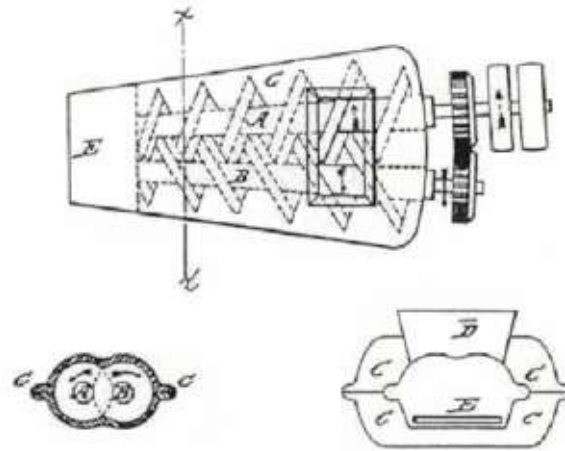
Wiegand's 1874 machine for dough sheet [Wiegand 1879]
